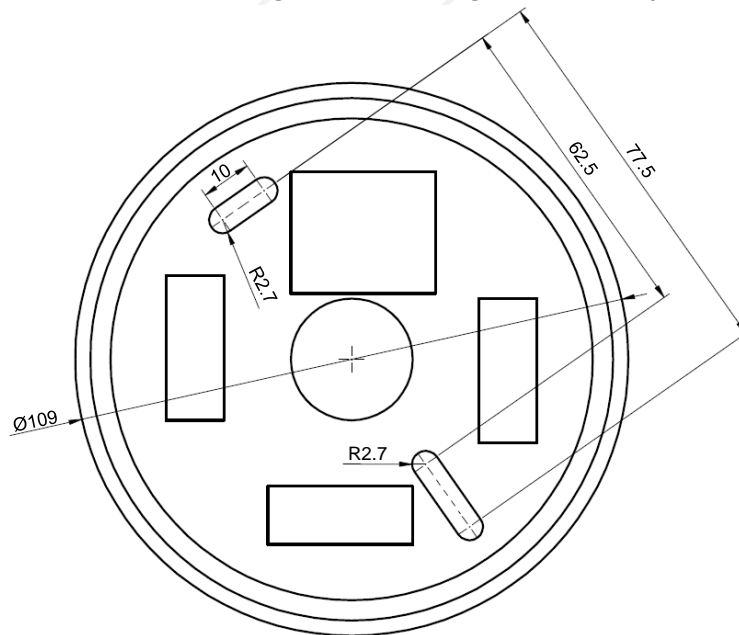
Dimensions and placement of OSD63 installation sockets.
